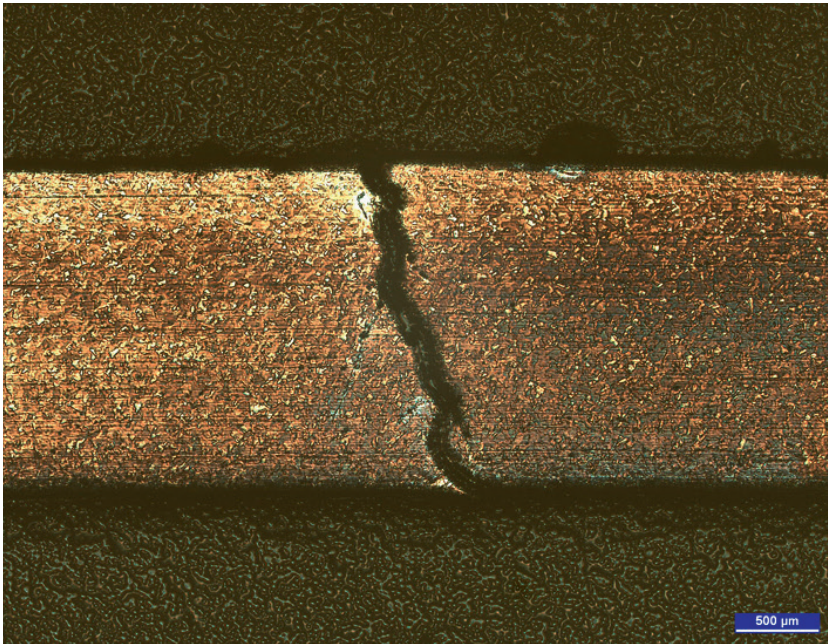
Crack area in longitudinal section, overview, Image 12,5:1, Etchant: Beraha II
